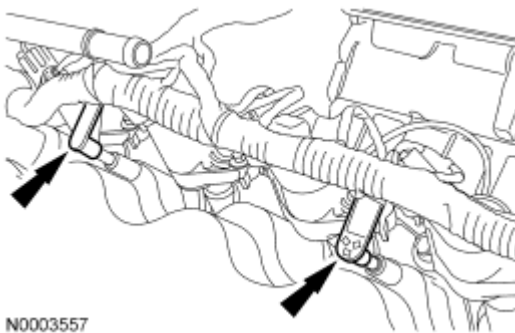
Locating Engine Wiring Harness Retainers At RH Valve Cover
